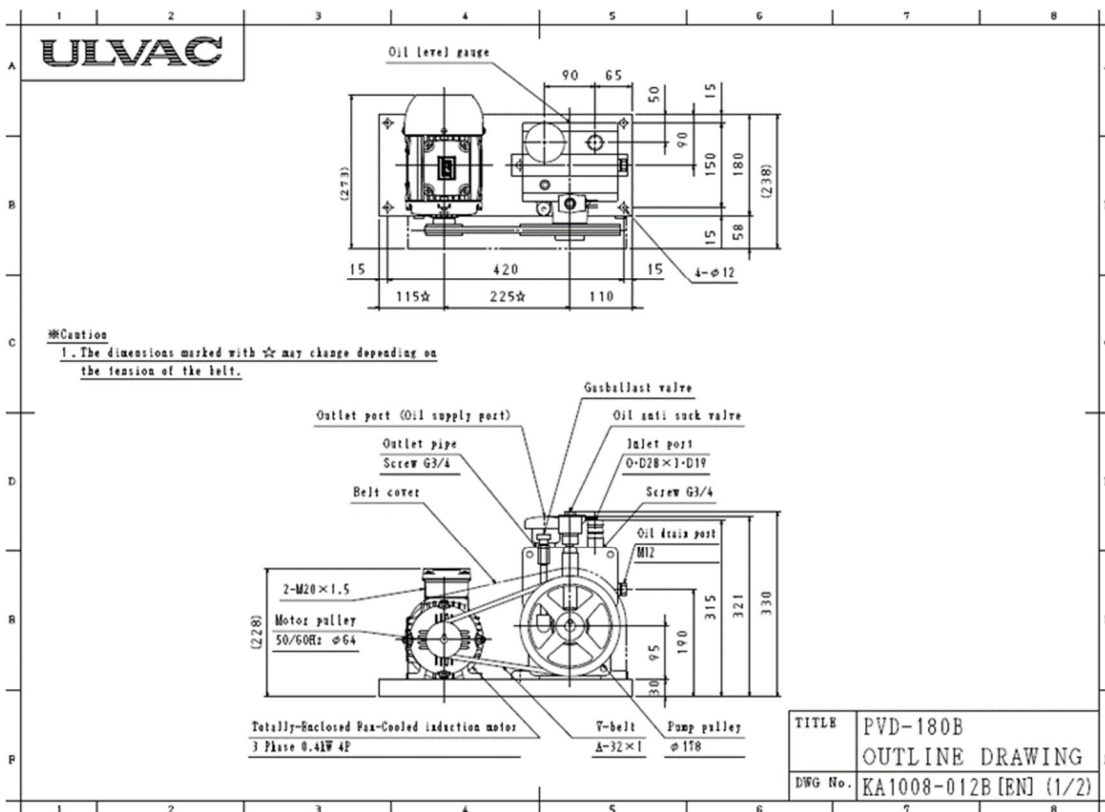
Dimensional drawing PVD-180B, PVD-180B-K
